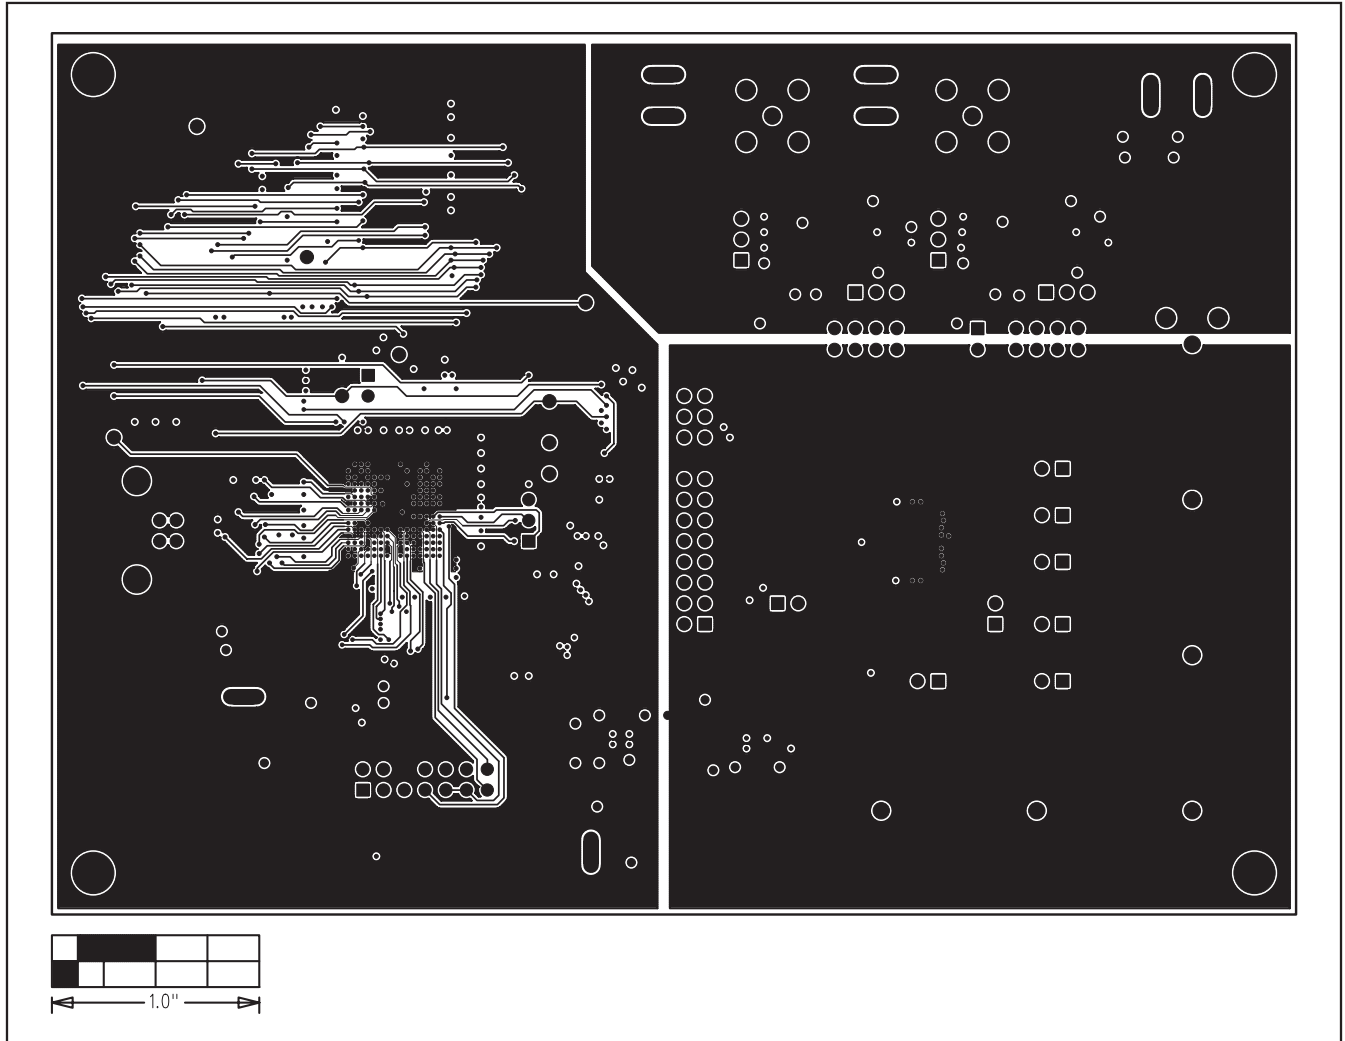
MAX11046 EV Kit PCB Layout—Inner Layer 2
